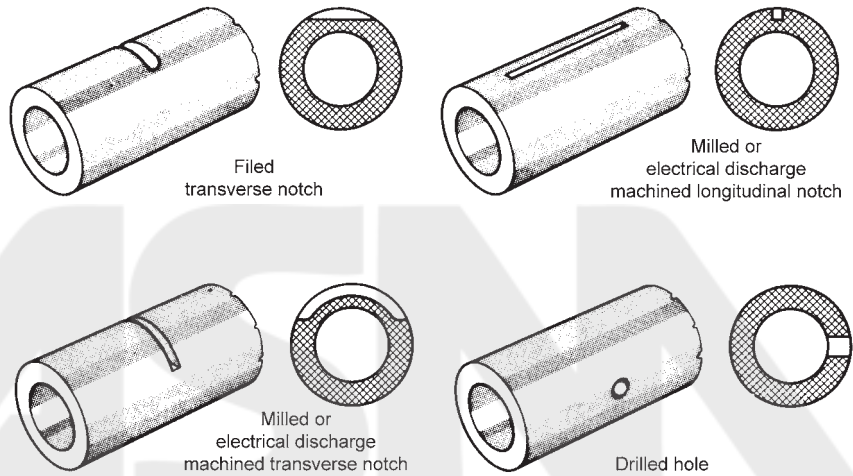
Several fabricated discontinuities used as reference standards in eddy current inspection. ASTM standards for eddy current testing include E 215 (aluminum alloy tube), E 376 (measurement of coating thickness), E 243 (copper and copper alloy tube), E 566 (ferrous metal sorting), E 571 (nickel and nickel alloy tube), E 690 (nonmagnetic heat-exchanger tubes), E 426 (stainless steel tube), and E 309 (steel tube). Source: Ref 3
